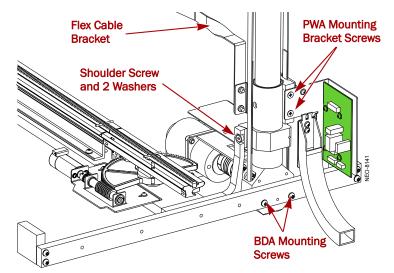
Reinstall Track Assembly to New Rear BDA
